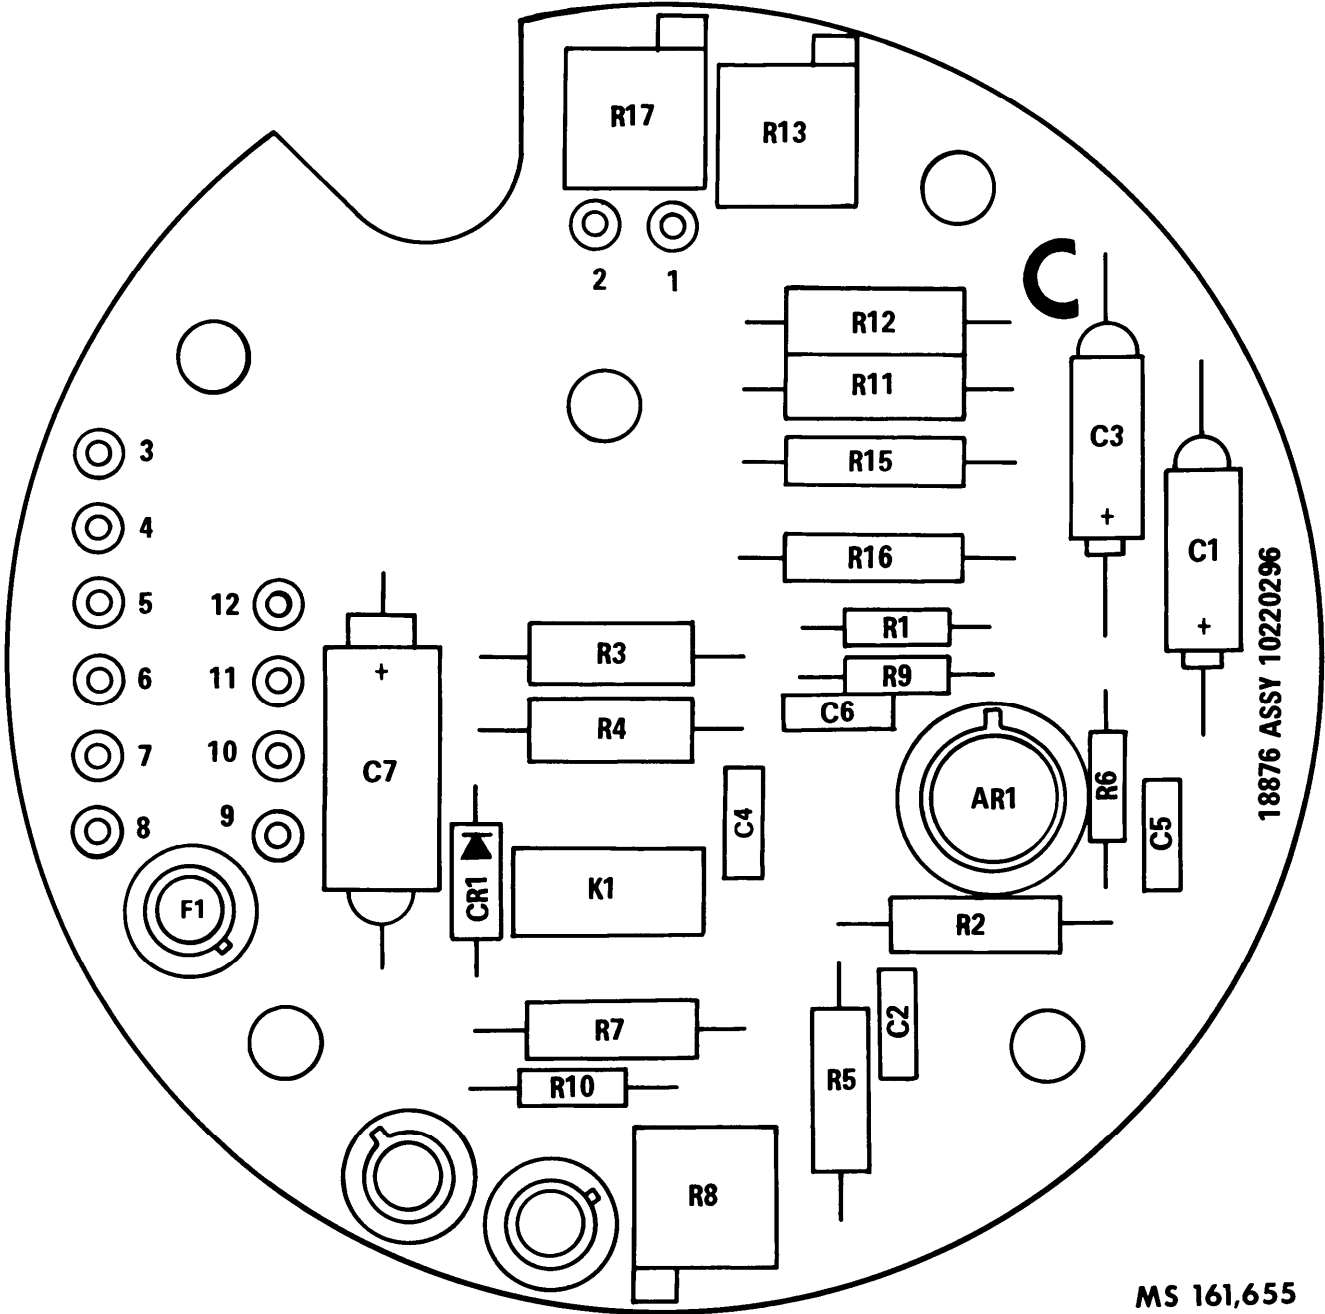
Circuit card assembly 3A1 (10220296) - locational diagram
